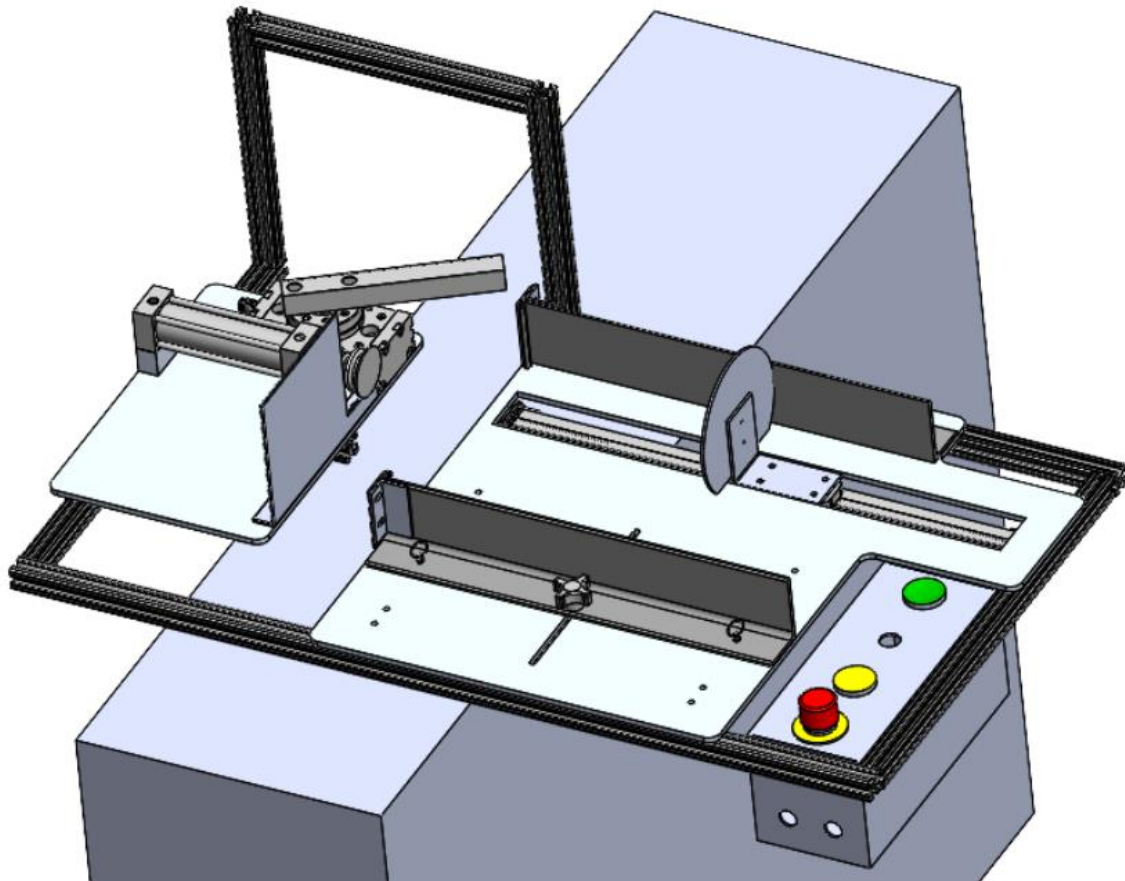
SOLIDWORKS assembly of the Carton Erector machine
